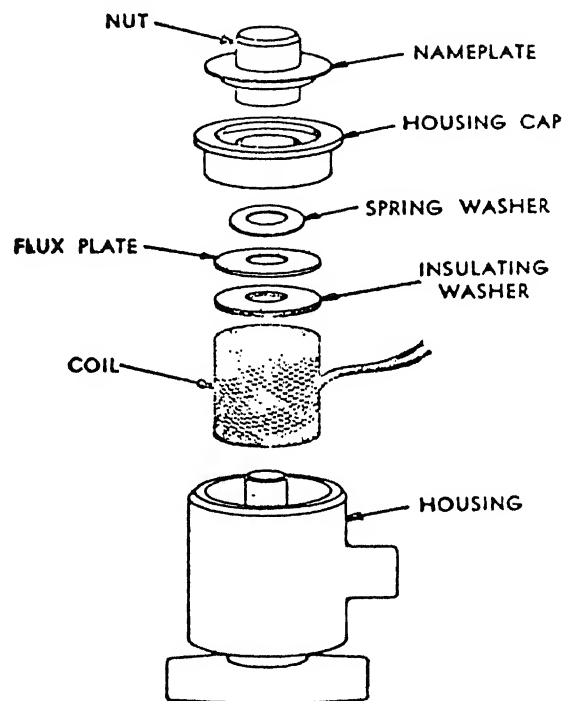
Solenoid Valve, Disassembly and Reassembly.
